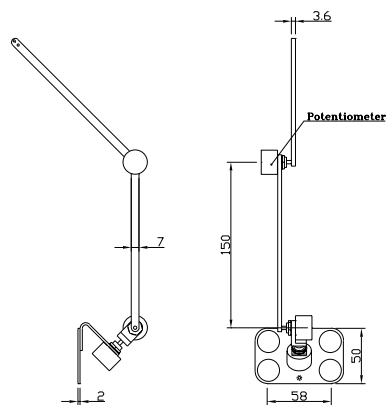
Assembly drawing of a 3-DOF manipulator.
